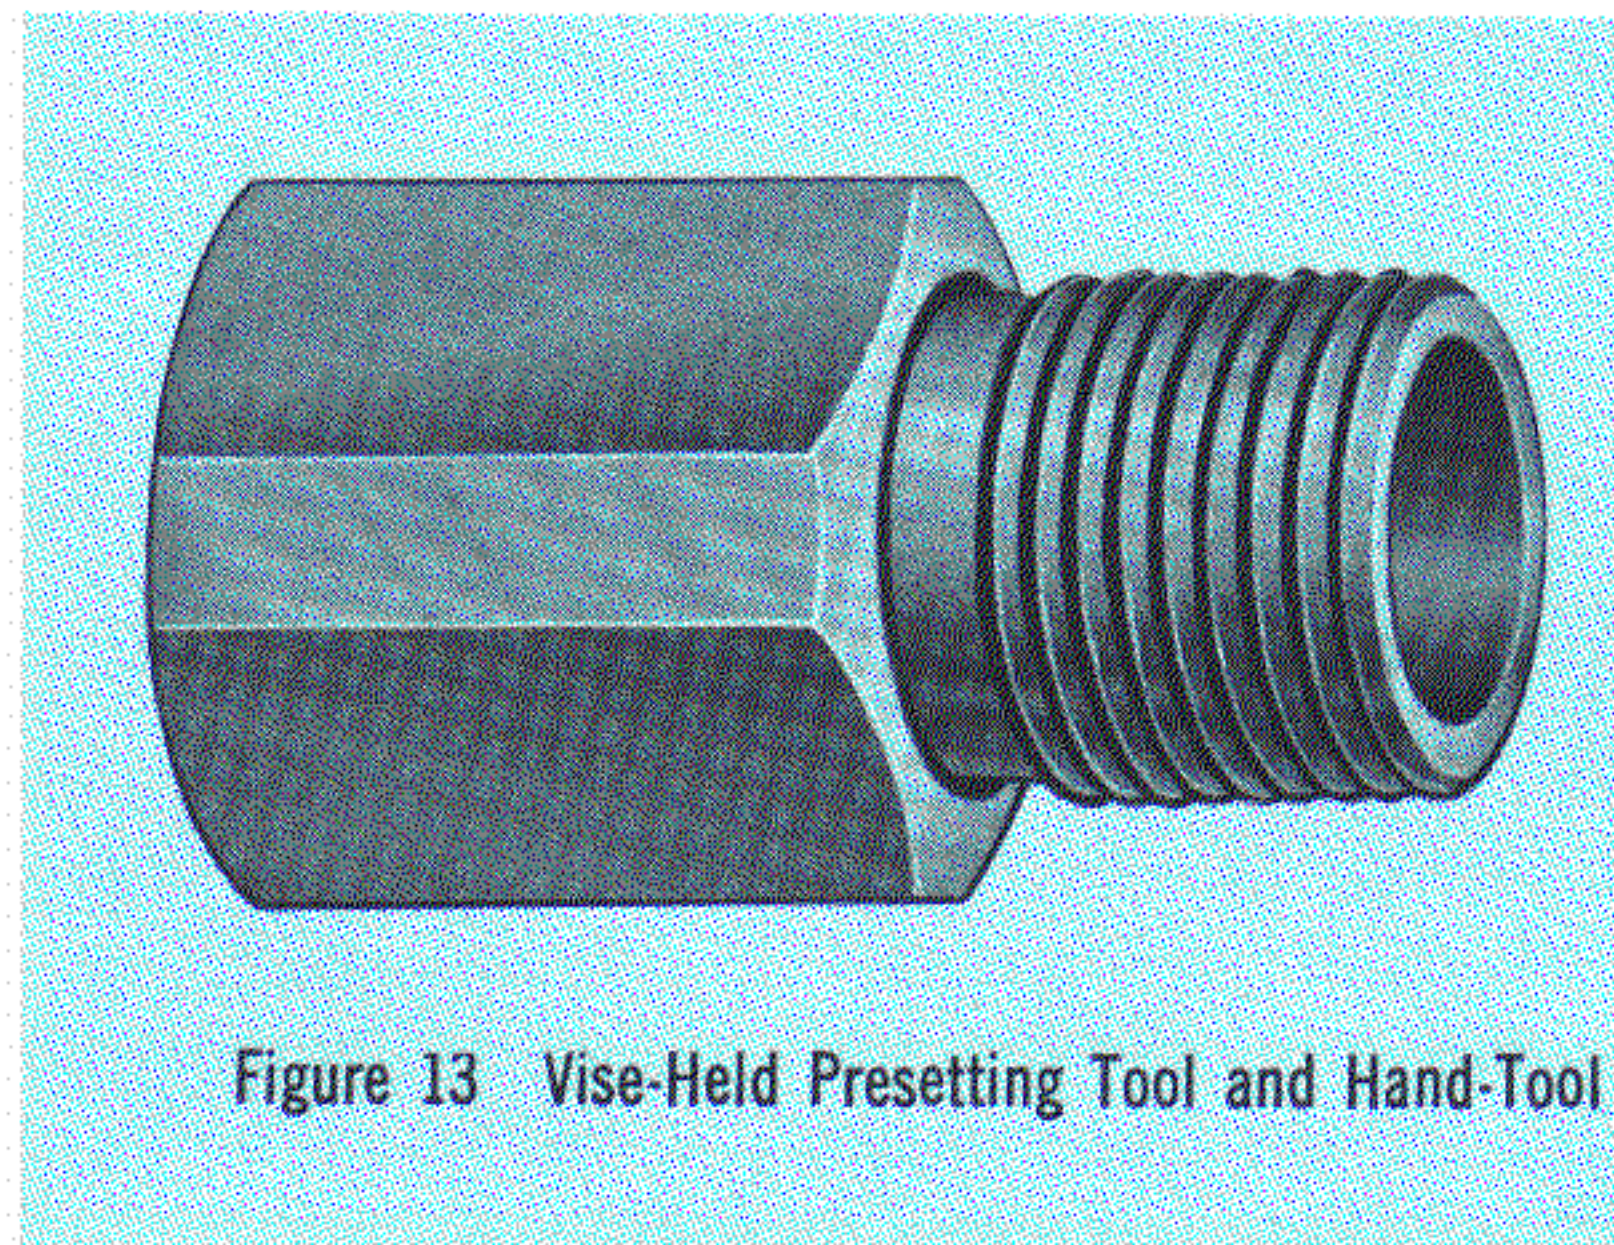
Vise-Held Presetting Tool and Hand-Tool Assembly Technique
